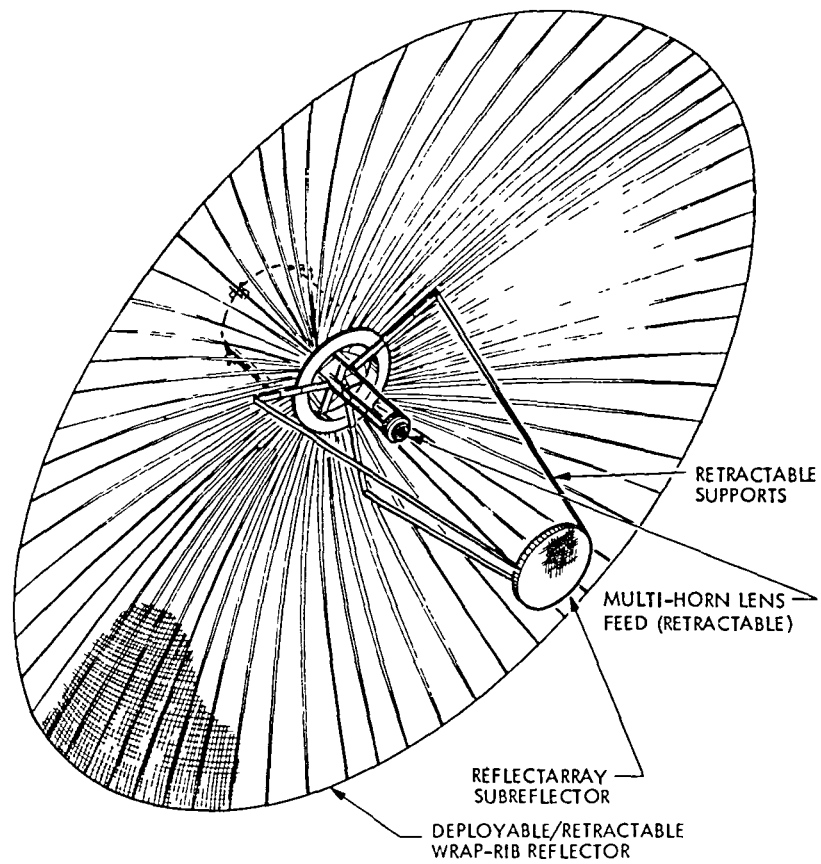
TYPICAL LOCKHEED WRAP-RIB ANTENNA: DEPLOYED CONFIGURATION
